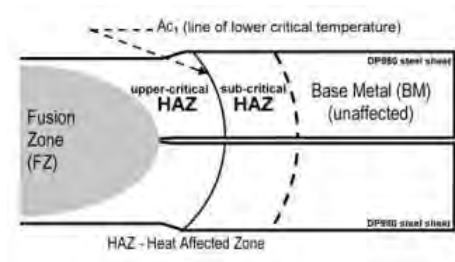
Schematic cross-section of a resistance spot weld [20].
